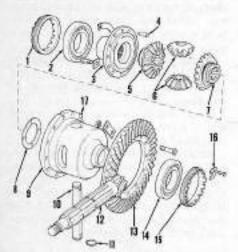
Exploded view of typical two pinion gear differential showing component parts and their relative positions. Note thrust washers (8) are not used on 1190, 1290 and 1390 models.
